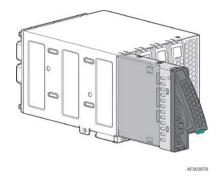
4x3.5" Hot-Swap Hard Disk Drive Cage
